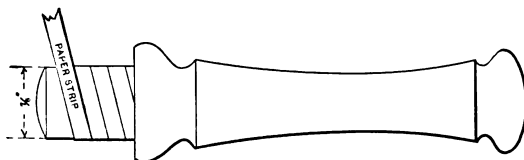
Pin Turned to the Proper Size.—Scale, 6 Inches to the Foot.
